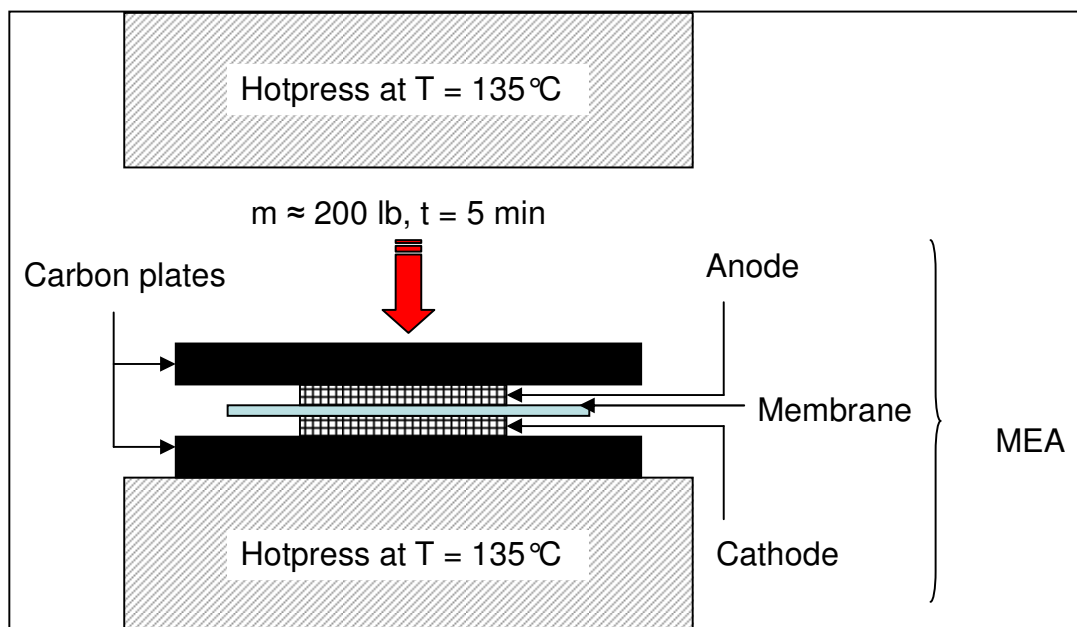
Hotpressing of the membrane electrode assembly
